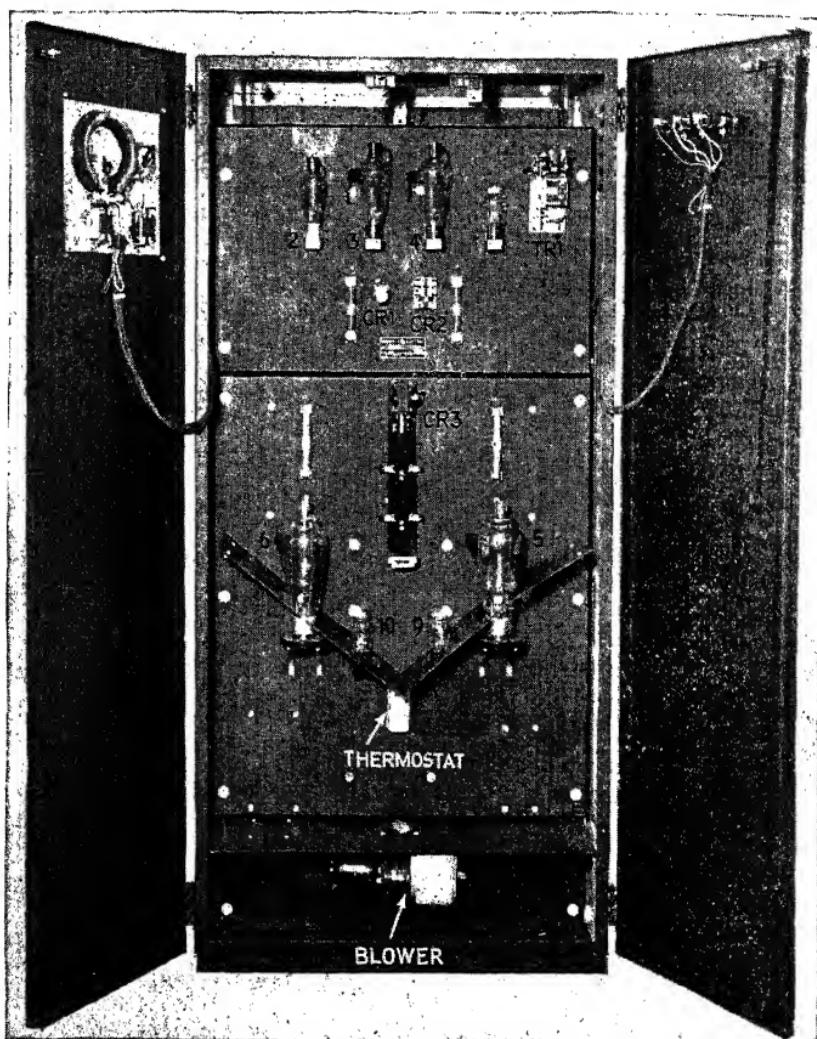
C.—Synchronous spot-welding control used with series capacitors or high-voltage supply. CR7503-A106.
